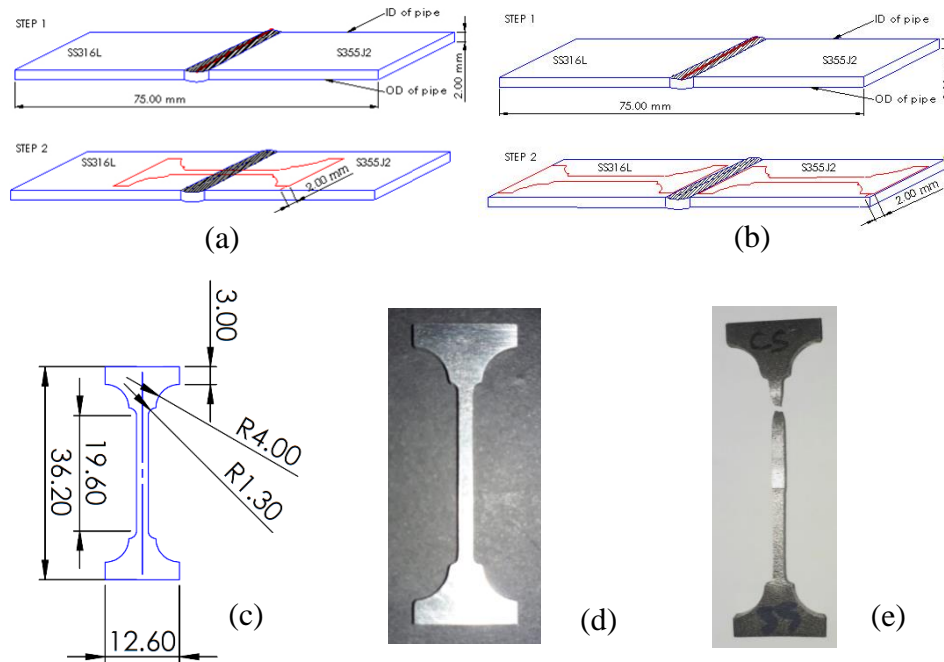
(a) Schematic of extraction of cross-weld tensile specimen, (b) schematic of miniature tensile specimen extracted from parent metal, (c) photograph of tensile specimen, (d) photograph of tensile specimen after polishing and (e) photograph of fractured tensile specimen.
